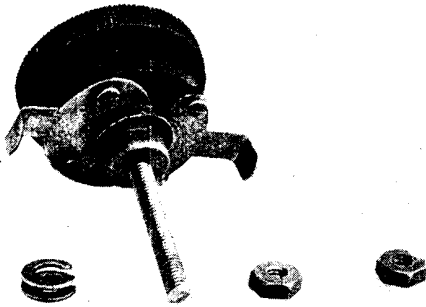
Moving parts—double switch arm, spindle and control knobs—are illustrated here, ready for assembly upon the switch panel shown in Fig. 2
